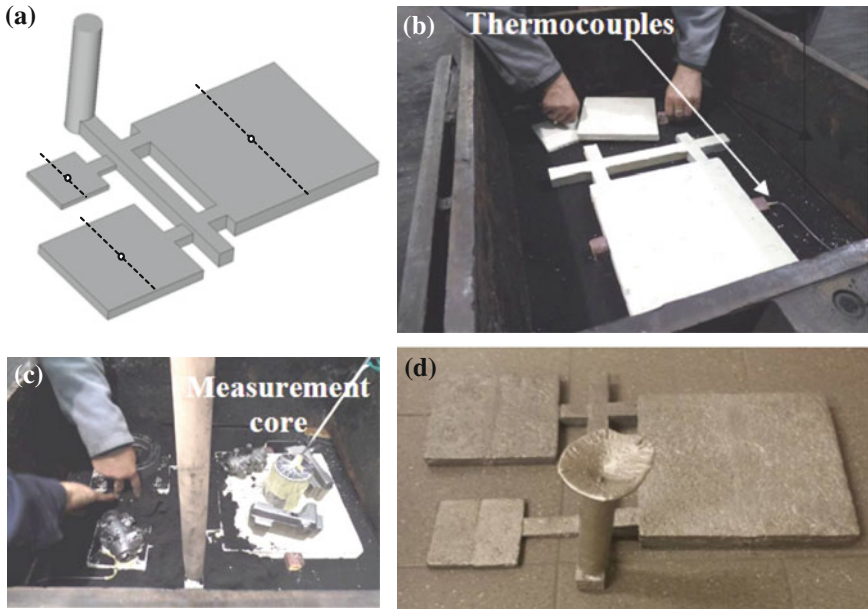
Second experiment (Exp. 2). Casting arrangement in the mould. a CAD casting model (with thermocouples positions), b, c expanded polystyrene model and mould instrumentation, d raw casting knocking out and blasted
